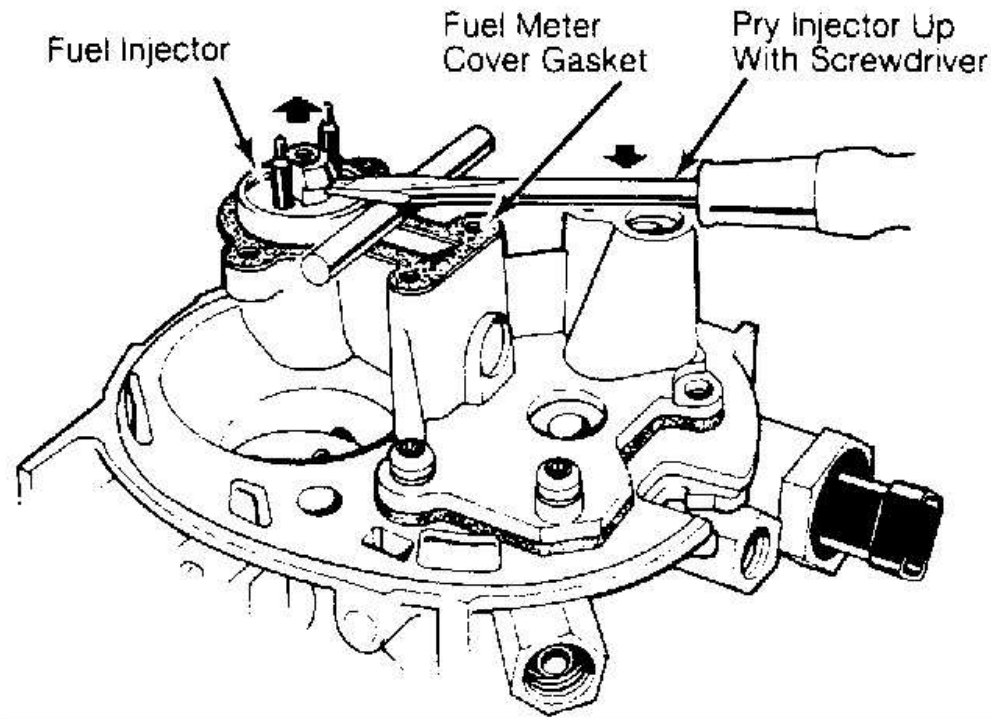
Removing Fuel Injector Assembly Keep fuel meter cover gasket in place until injector is removed to prevent damage to casting.
